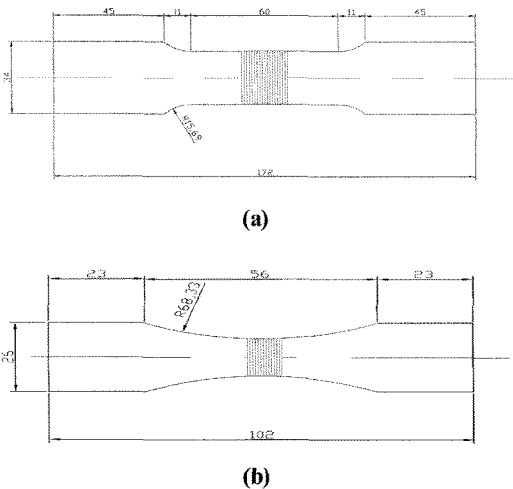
Schematic of tensile (a) and fatigue (b) test specimens.
